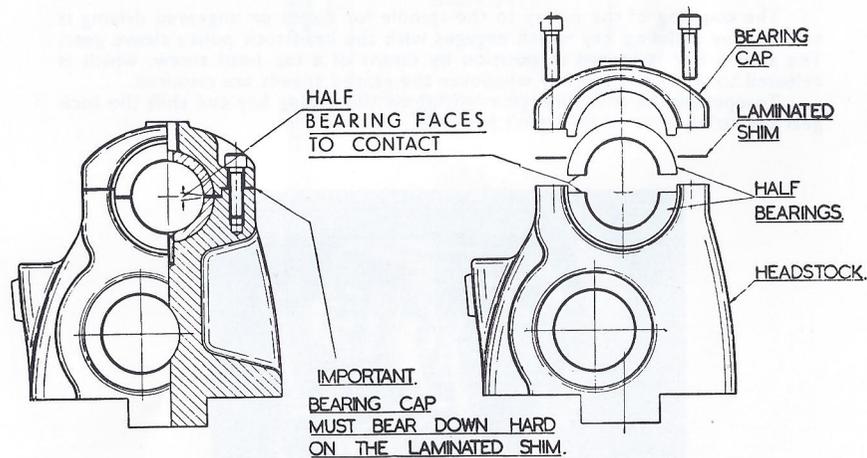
Showing Method of Adjusting ML7 Lathe Headstock Bearings.
